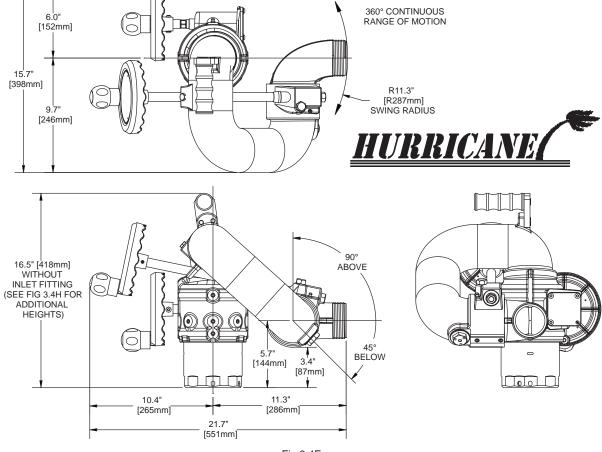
F Hurricane Dual Handwheel Overall Dimensions (XFIH-D series)
